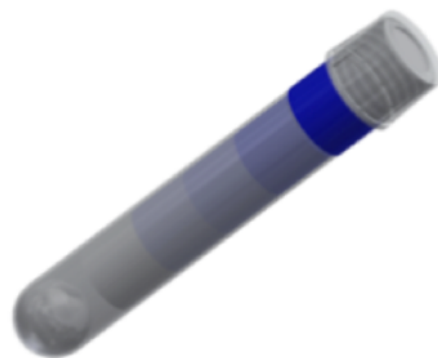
CAD drawing of Billion Bottle Project's sensor
